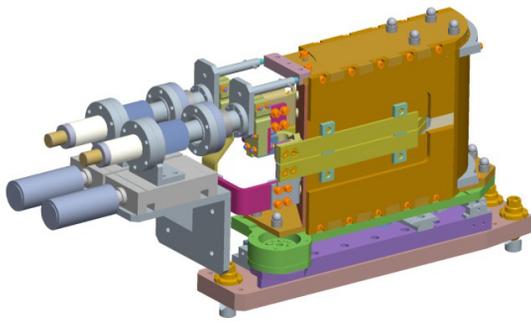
CAD model of the EMMA septum magnet outside its vacuum chamber.
